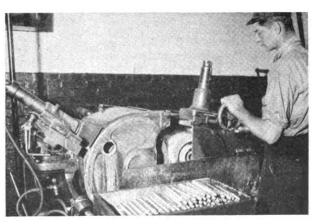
Shafts are finished to size within 0.0002 in. in this Cincinnati centerless grinding machine.
